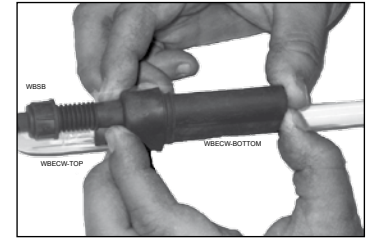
Position your hands and fingers as shown on the picture to insert the bottom part into the top part of the WBECW
